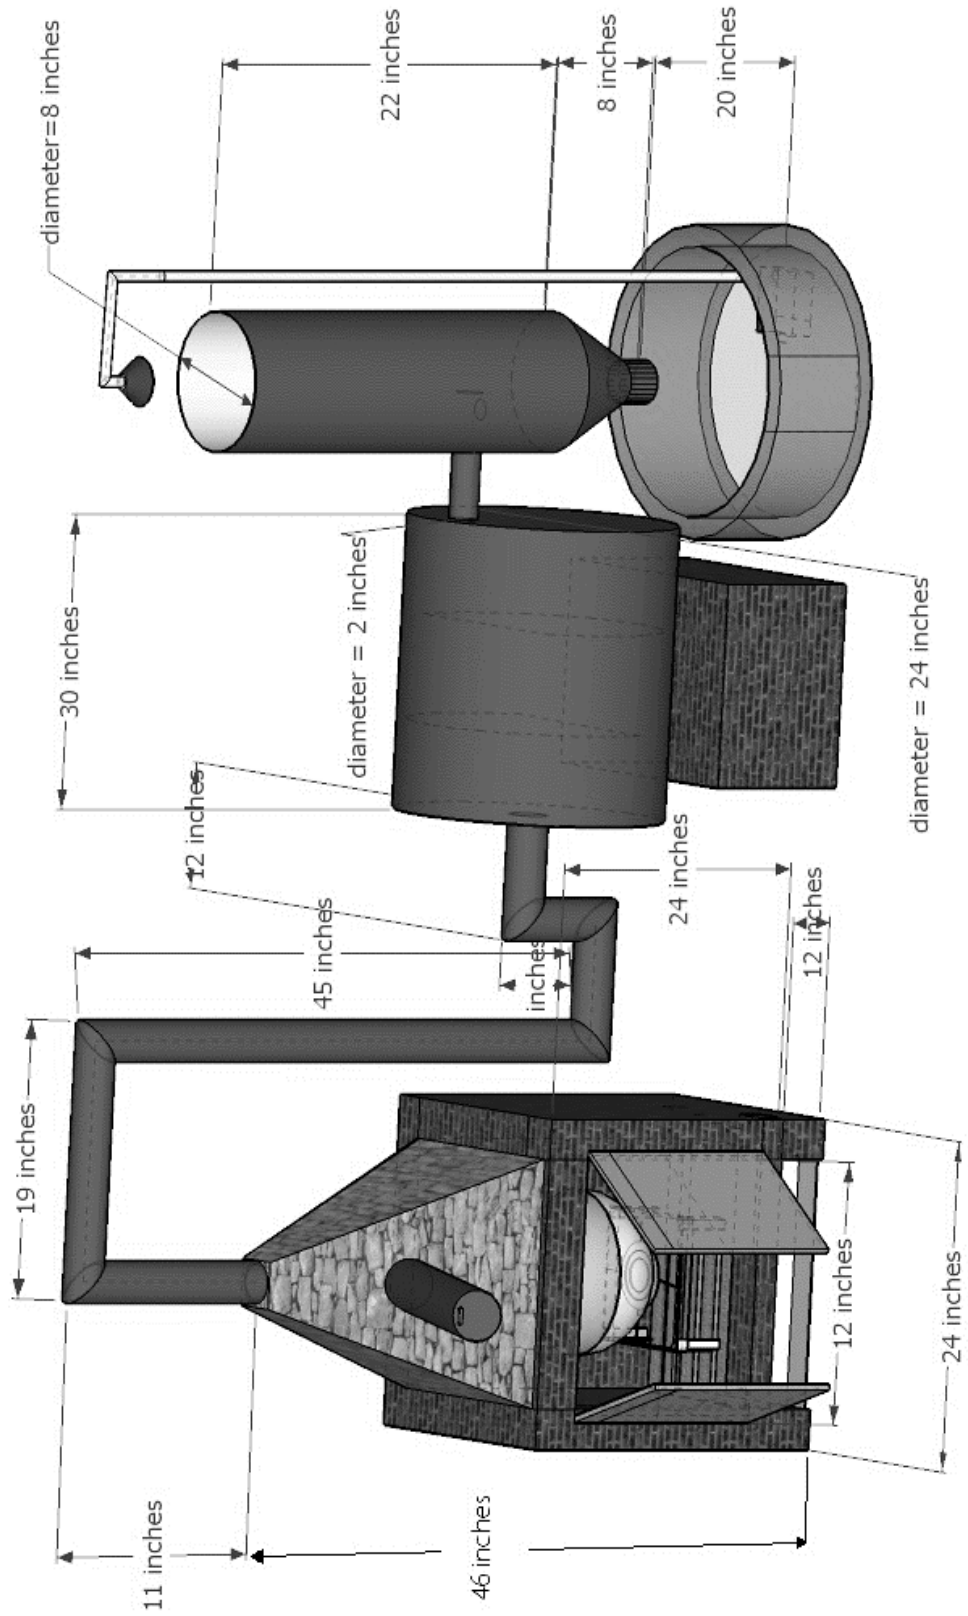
Liquid smoke flavoring preparation assembly (with dimensions)
